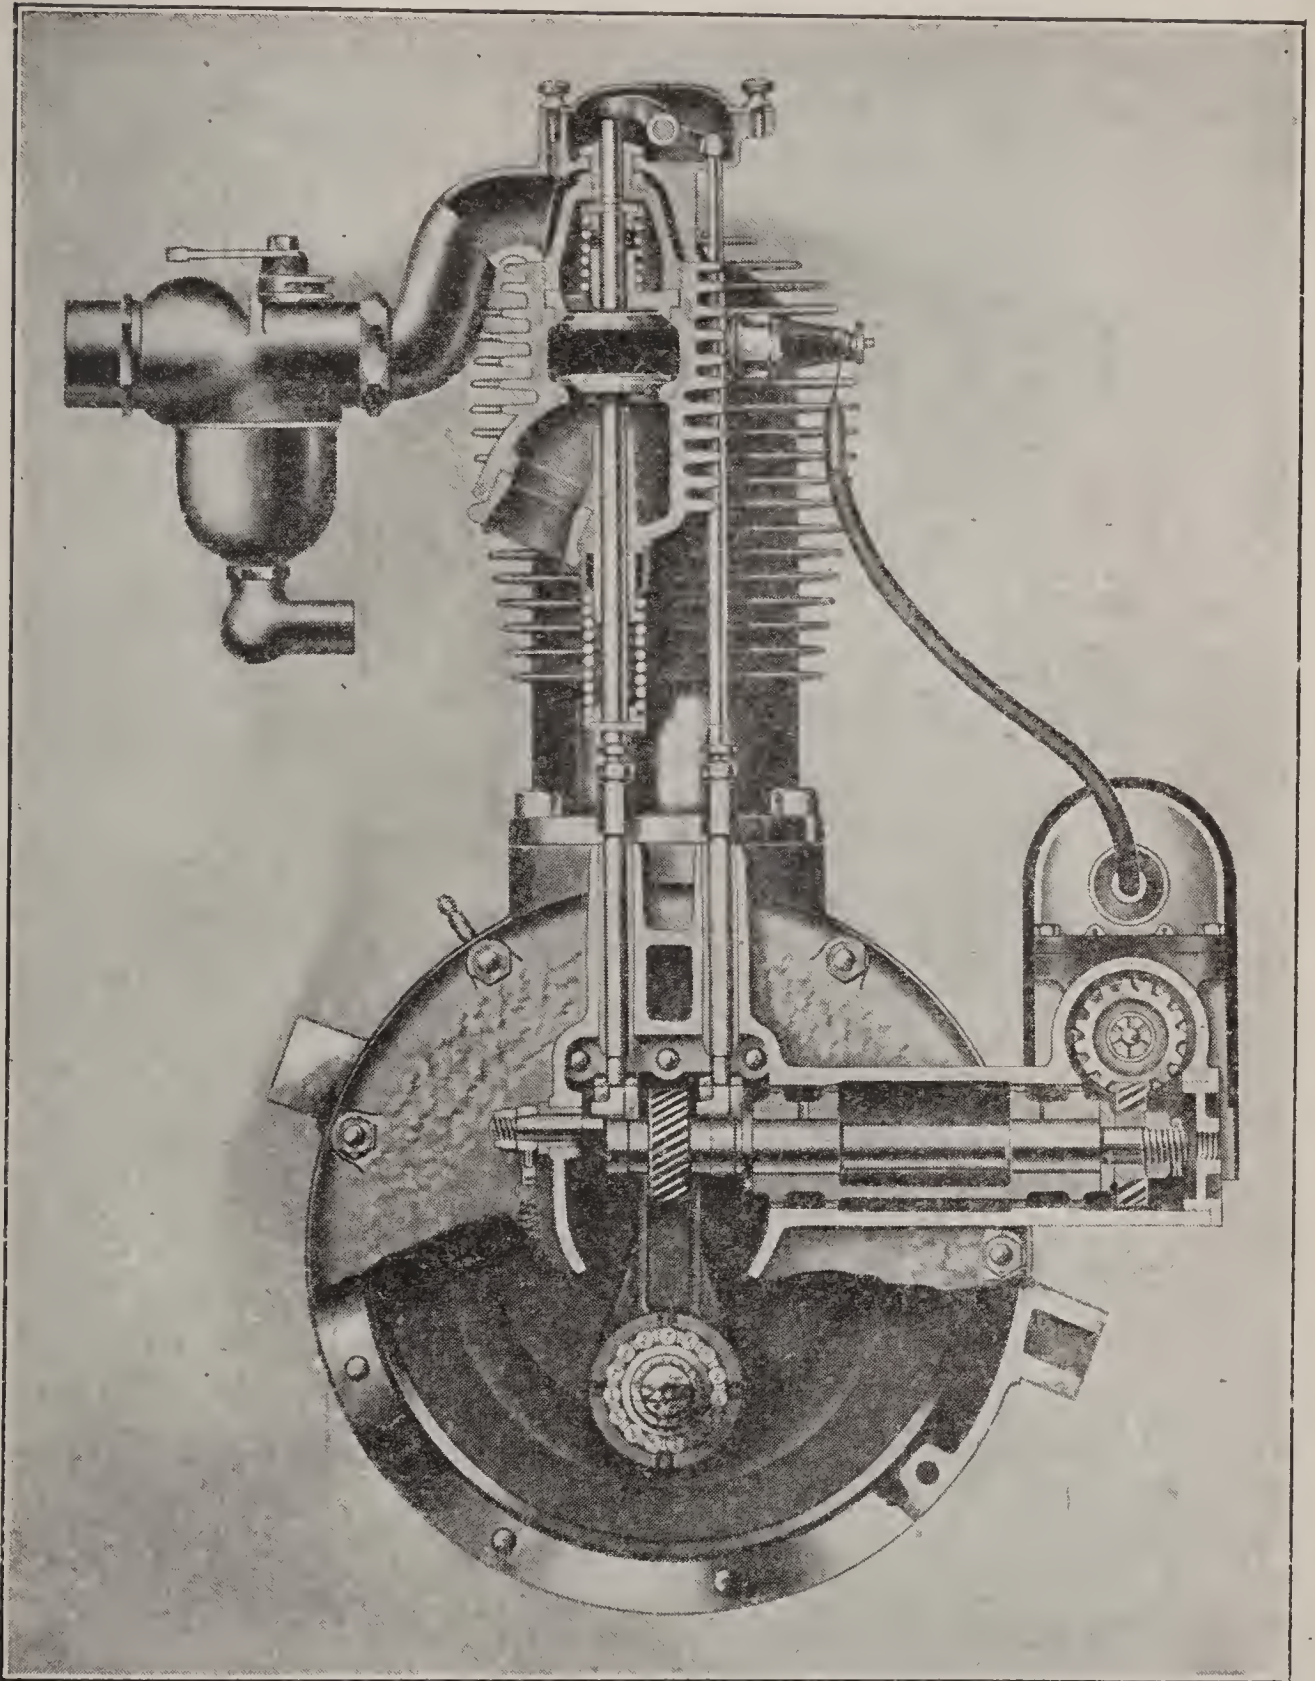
Valve Operating System and Magneto Drive of the De Luxe Single Cylinder Motorcycle Engine. Note Also Roller Bearings in Connecting Rod Big End.
